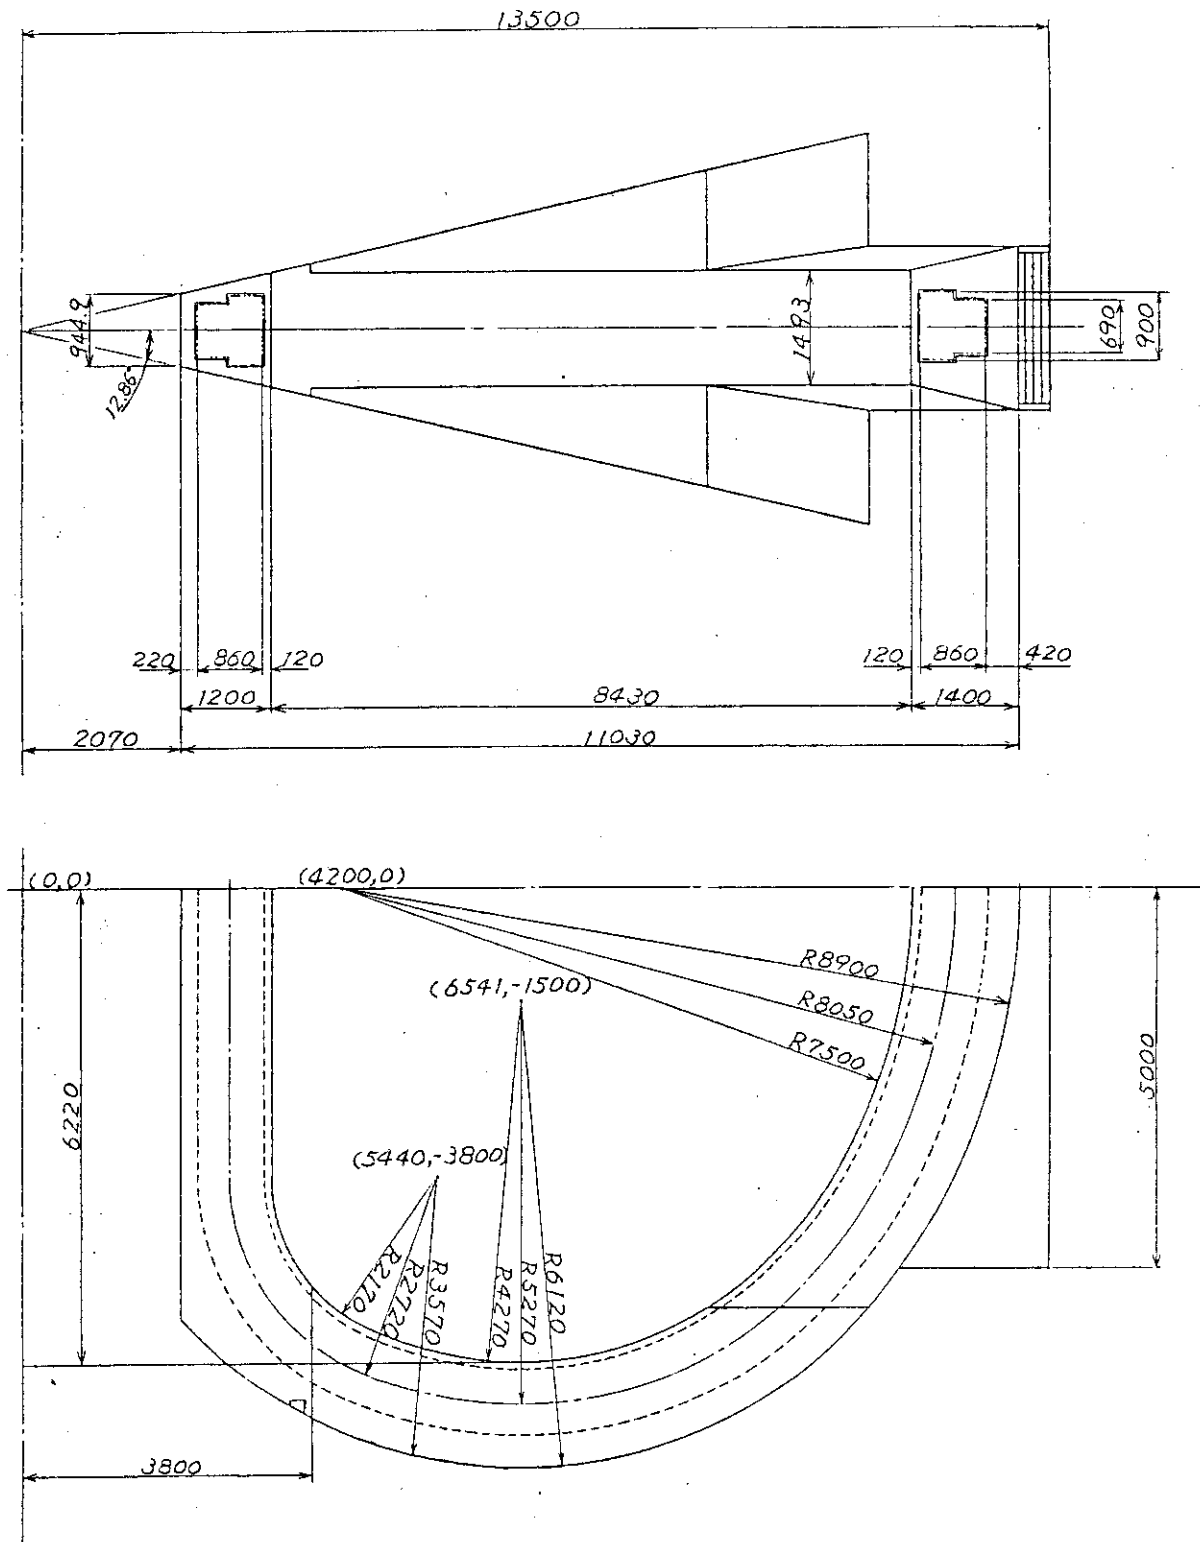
TF Coil Structure (SPTR Power Plant)
